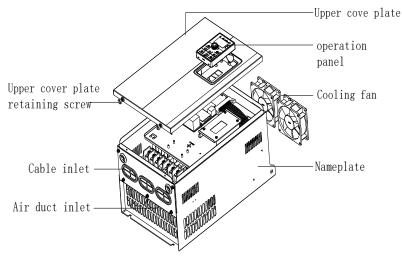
Product outside drawing (15kW G3), installation dimension
